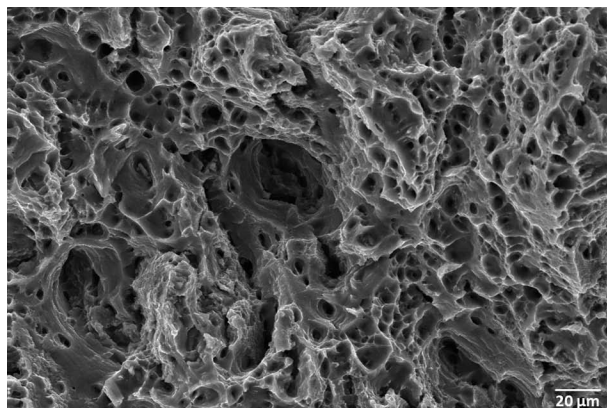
Higher magnified image of the fracture surface shown in Fig. 176 indicating ductile fracture evidence by the presence of dimples
